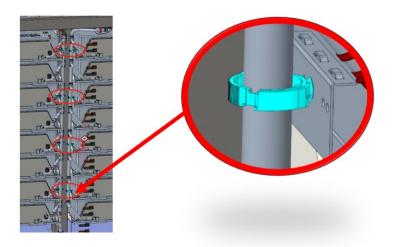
Fix Each Secondary Outlet Pipeline to Sheet Metal Part Inner Hole
